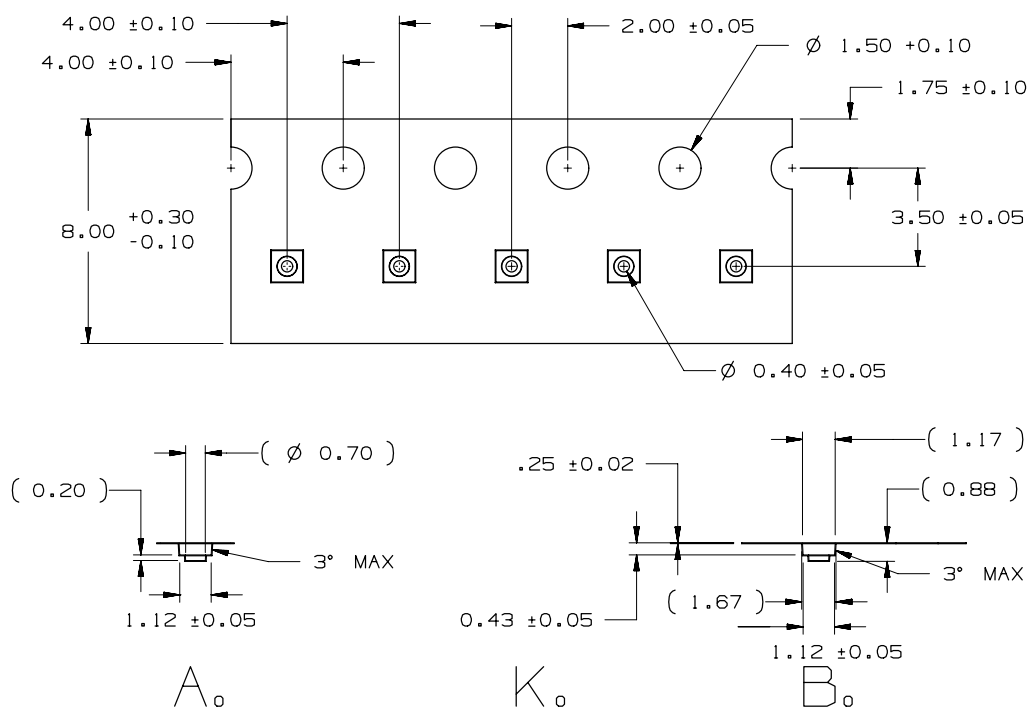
Pocket tape dimensions for LUXEON UV FC1.
